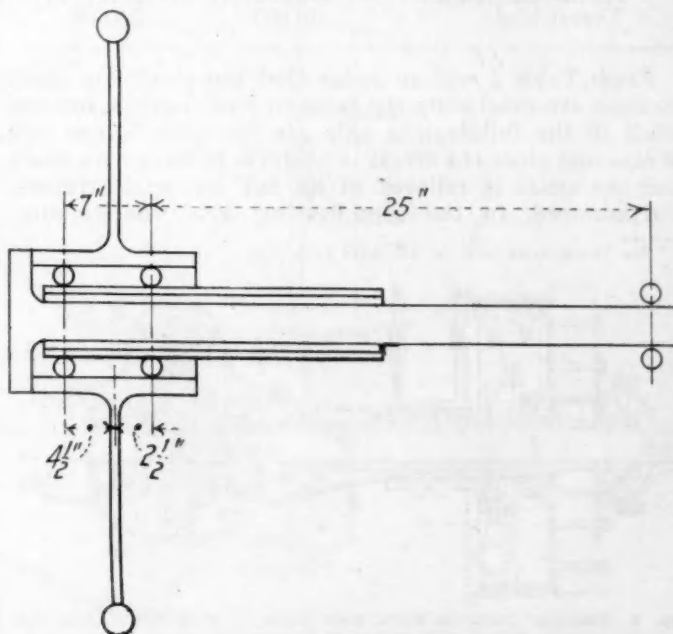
DIAGRAM ILLUSTRATING THE BEARING LOADS AND SHAFT STRESSES IN A FULL-FLOATING AXLE
